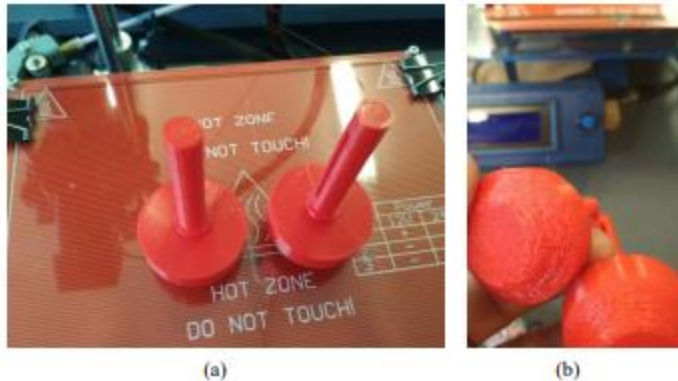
Button final product (a) two pieces and (b) the need for finishing the final surface of round parts.
